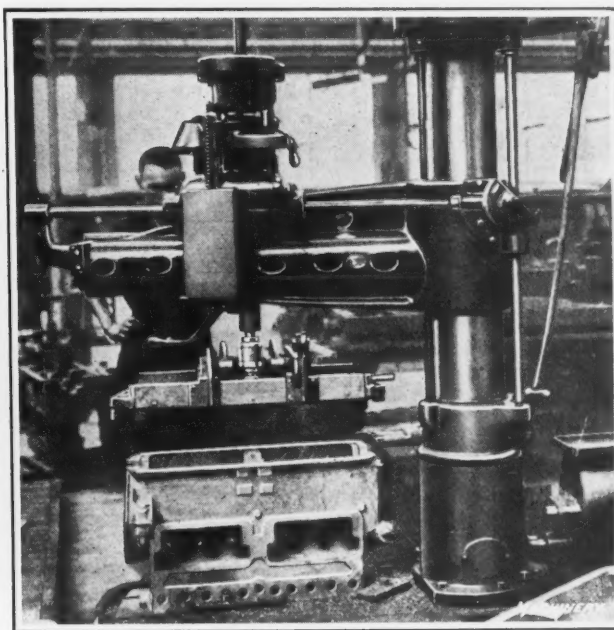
Jig held by Chuck Several Inches above Finished Work to permit it to be replaced by an Unfinished Casting
